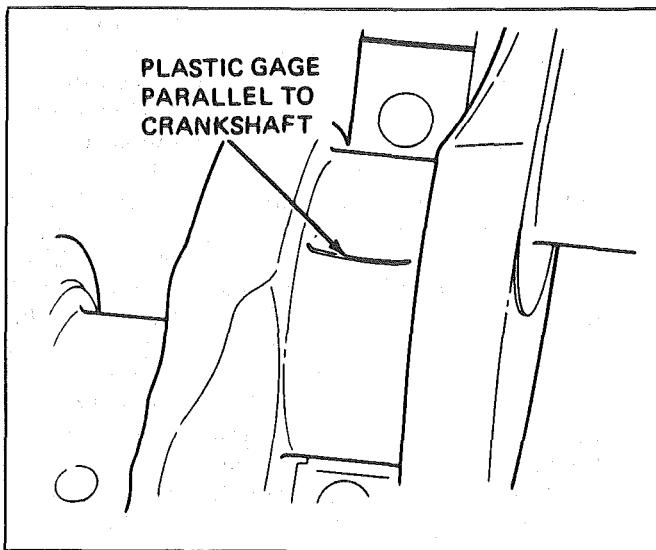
A3-39 Gaging Plastic on Journal-Typical
